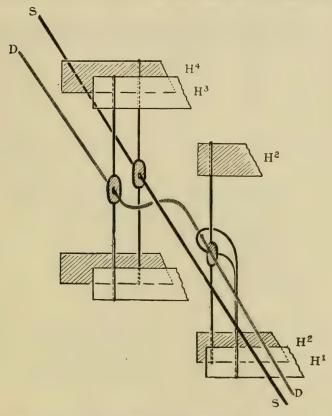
A.—HEALD-SHAFT MOUNTING—PLAIN GAUZE. (With threads D drawn through threads H3 and H1.)
